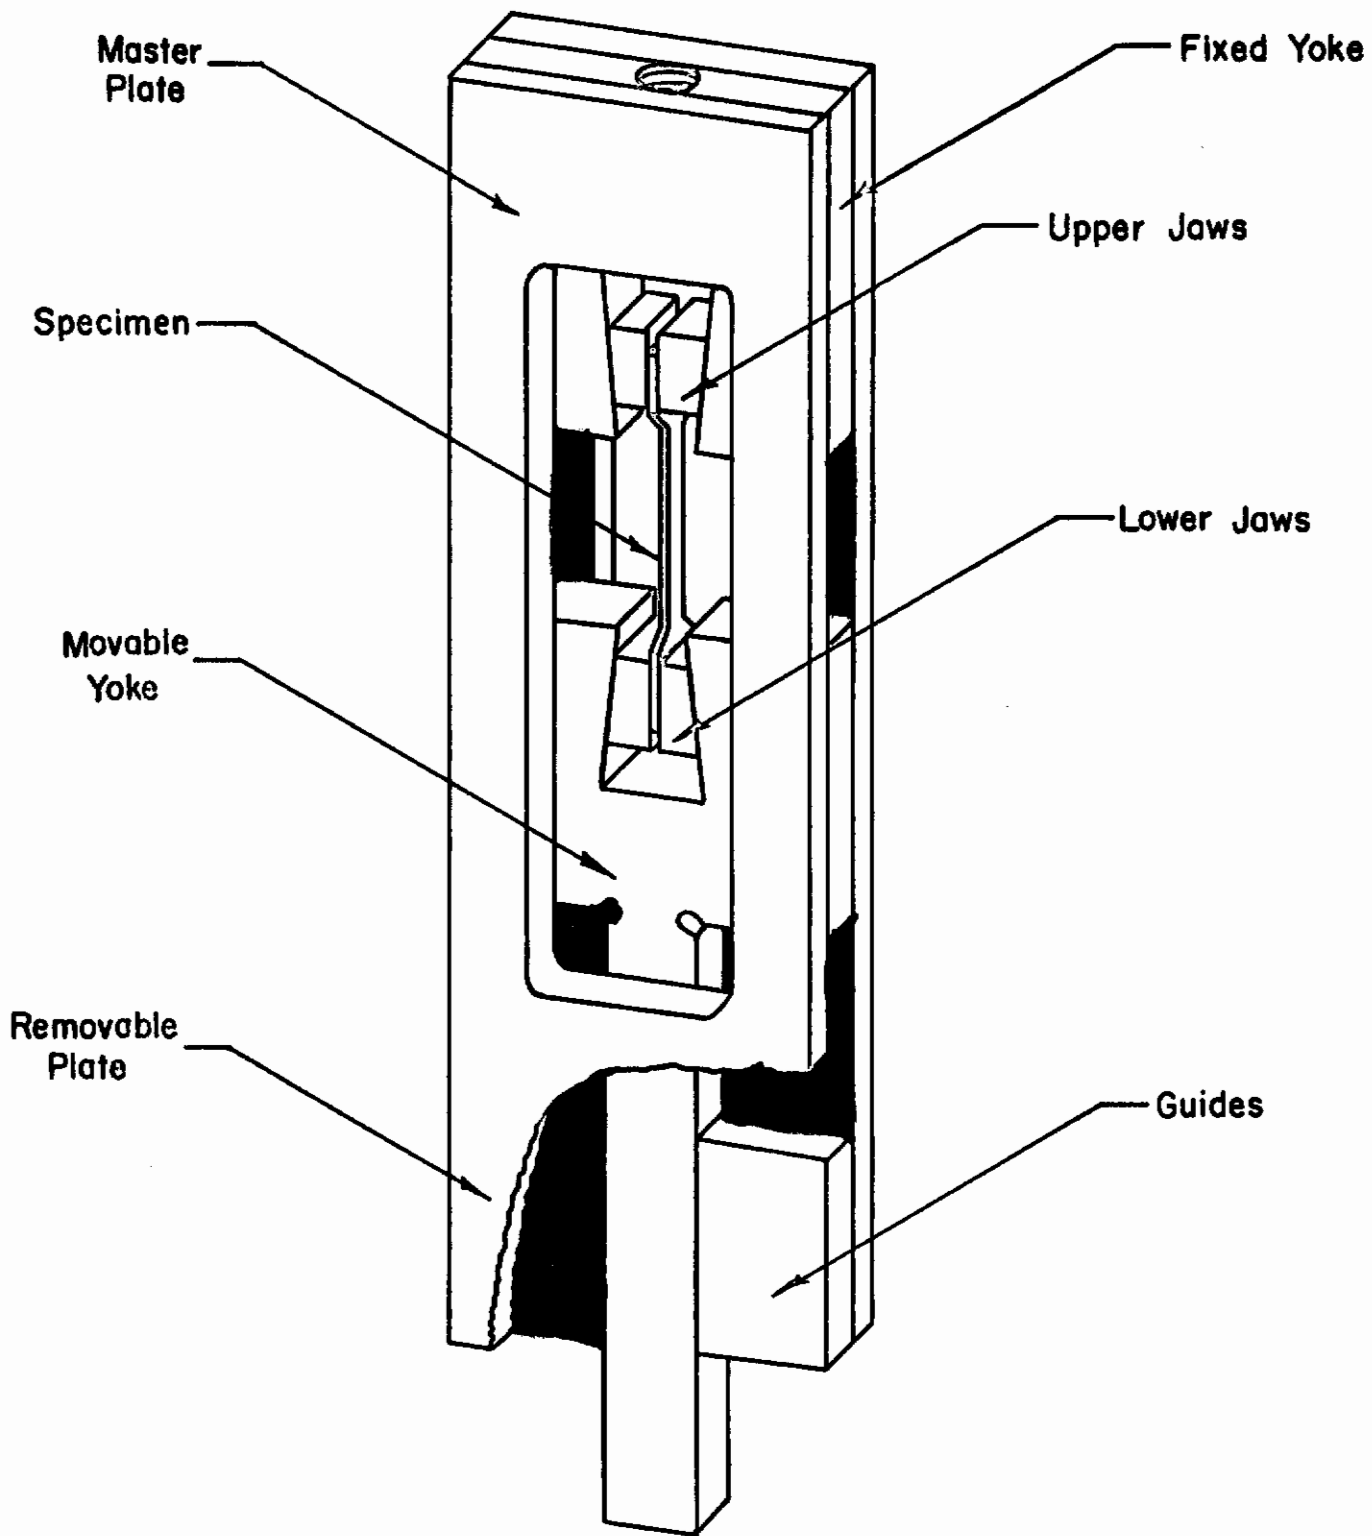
SPECIAL ATTACHMENT USED ON TENSILE MACHINE TO INSURE PROPER ALIGNMENT WHEN TESTING BERYLLIUM TENSILE SPECIMENS.
